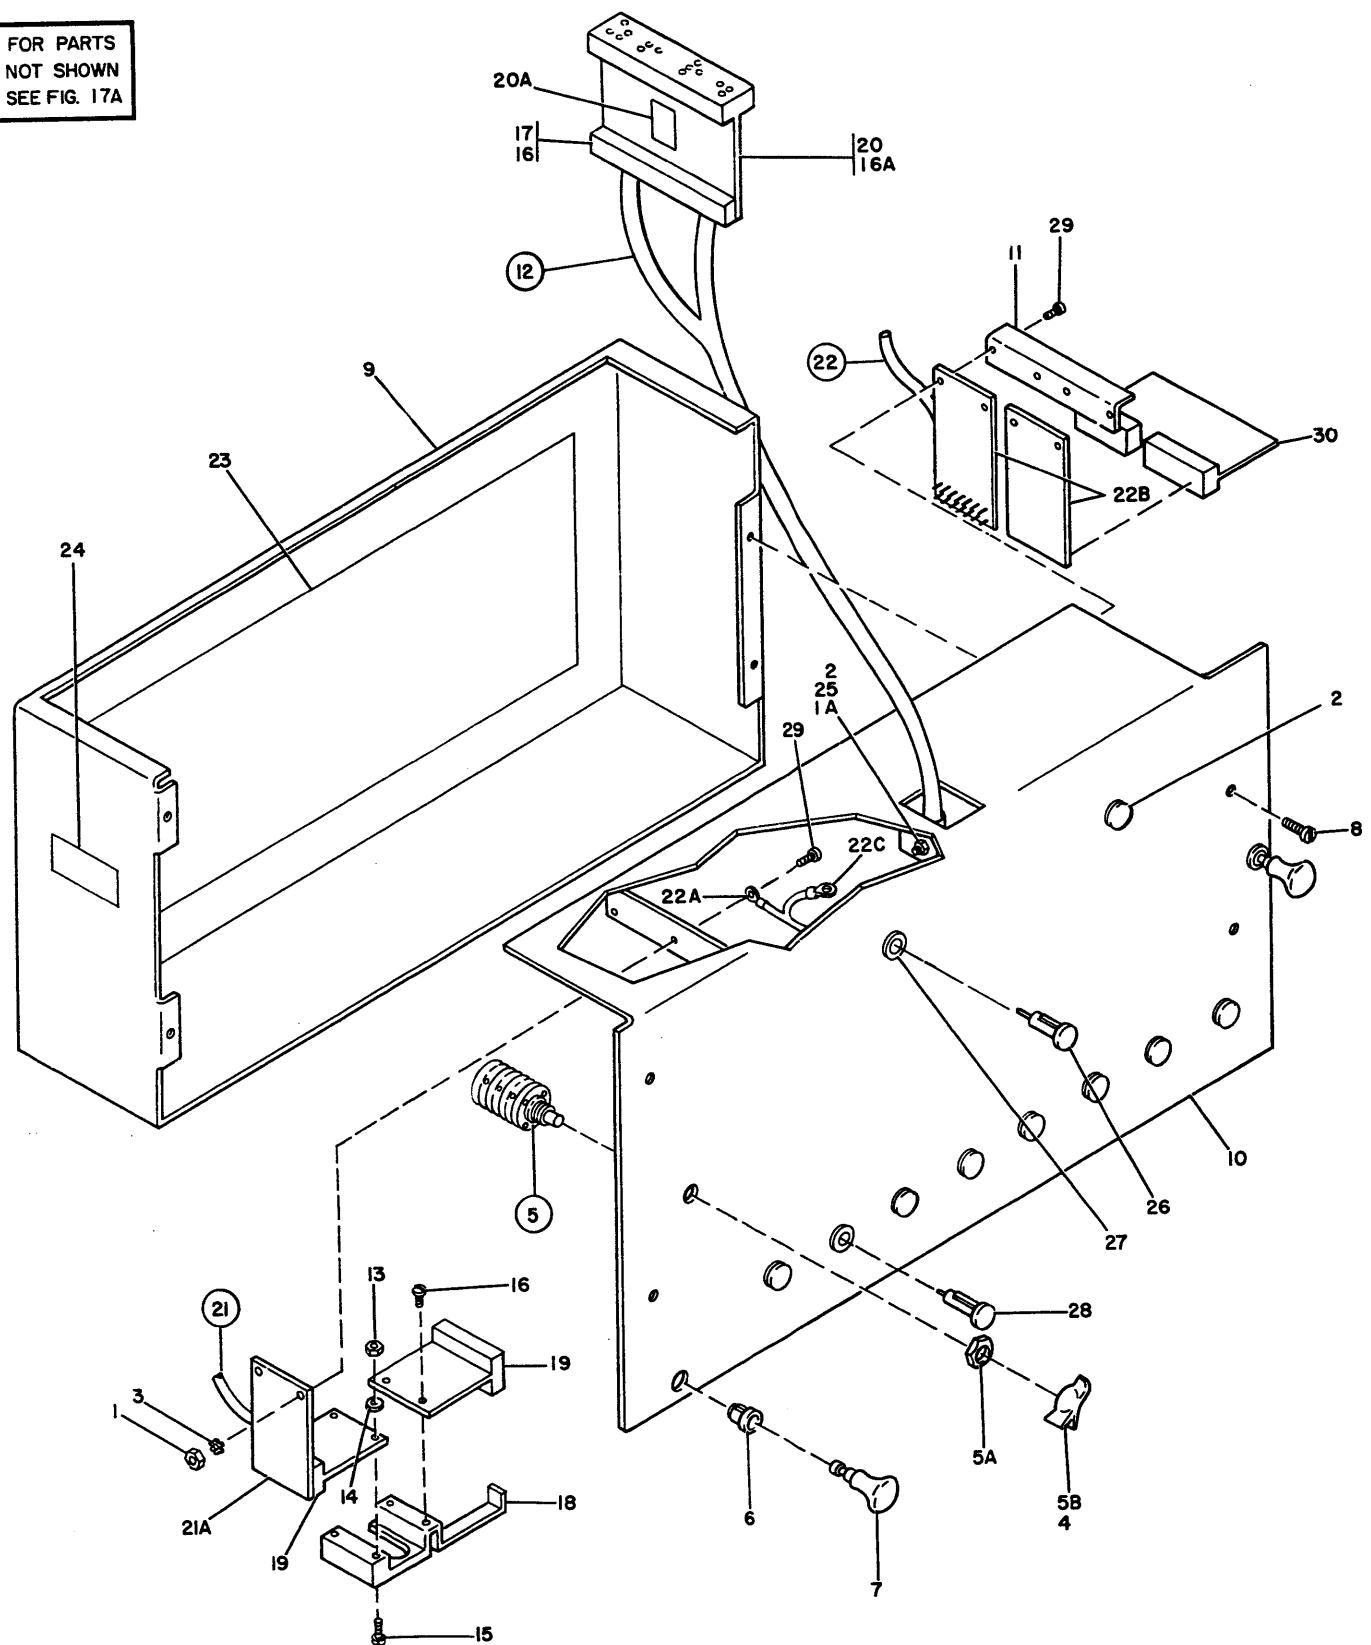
B. INDICATOR BOX ASSEMBLY. SEE LIST 17B.
